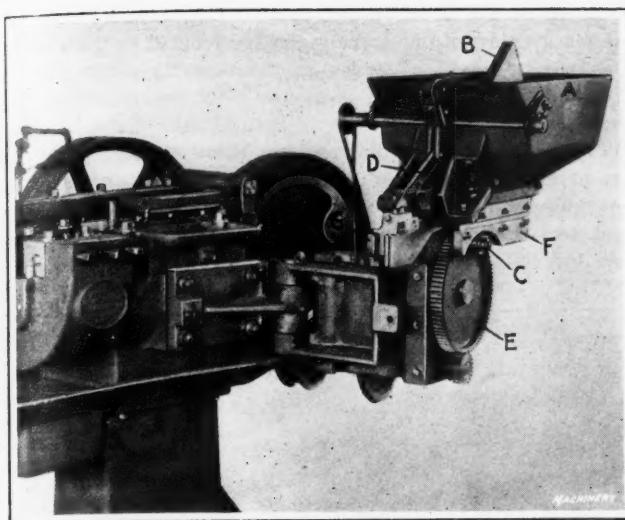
Feeding Mechanism of Machine shown in Fig. 7 swung out of the Way to permit Hand Feeding
